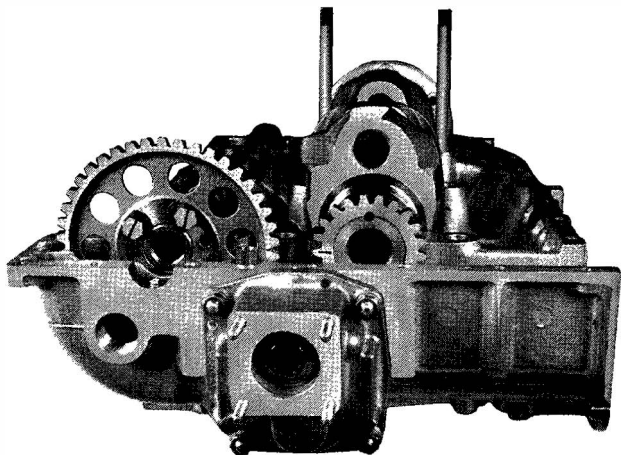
Showing Timing Marks Position on Camshaft Gear and Crankshaft Gear
